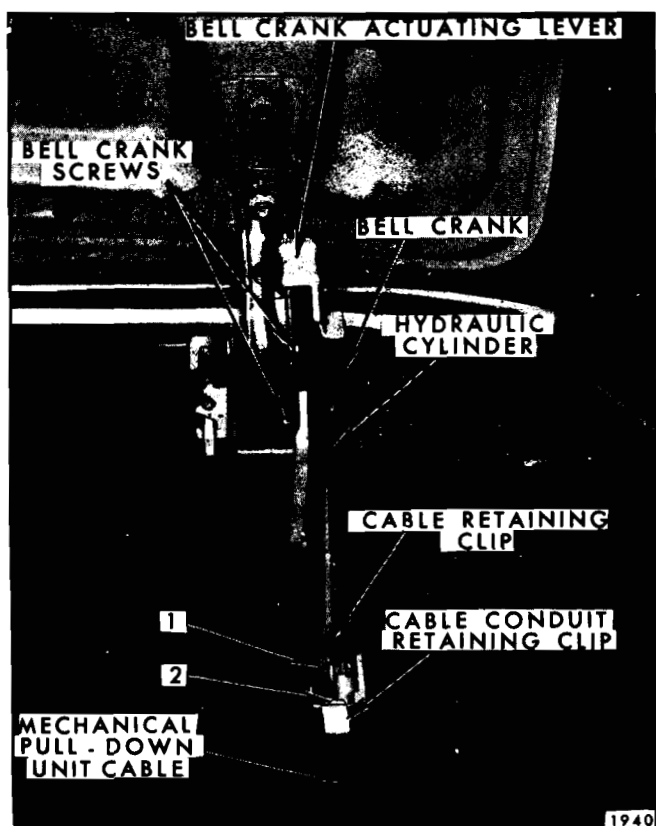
Mechanical Pull-Down Unit Hydraulic Assembly - Cadillac Styles with Option
